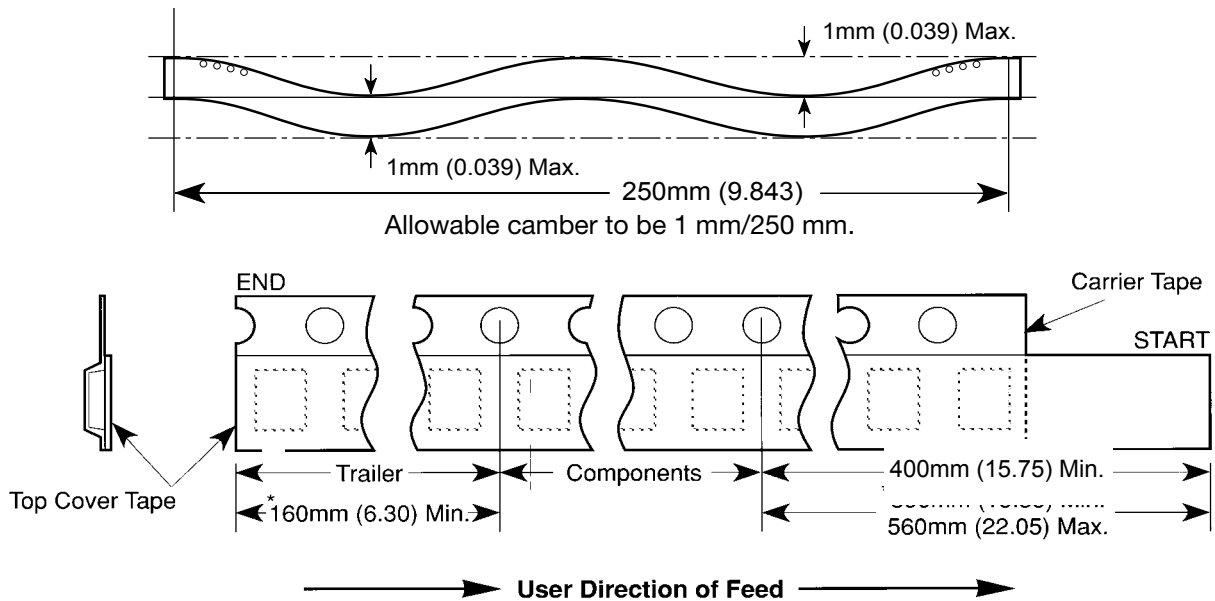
Tape Leader & Trailer Dimensions (Metric Dimensions Will Govern)
